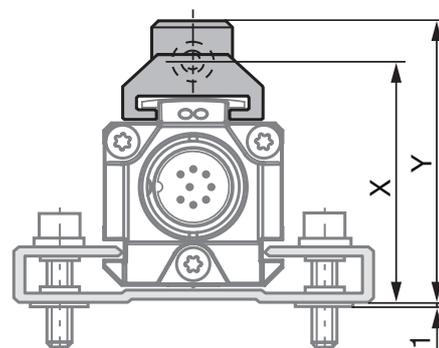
Dimensions and distances with BTL5-M/N-2814-1S magnet
